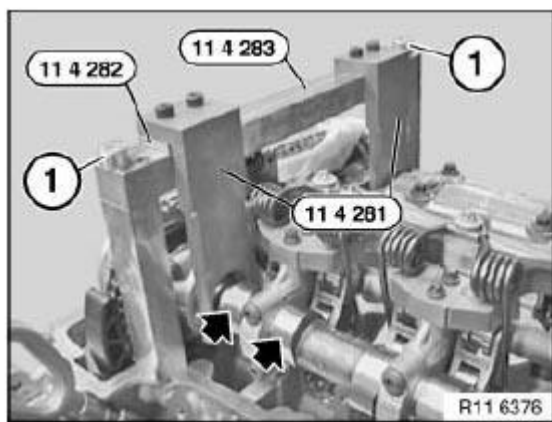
Identifying Central Bolts On Adjustment Units And Camshafts
